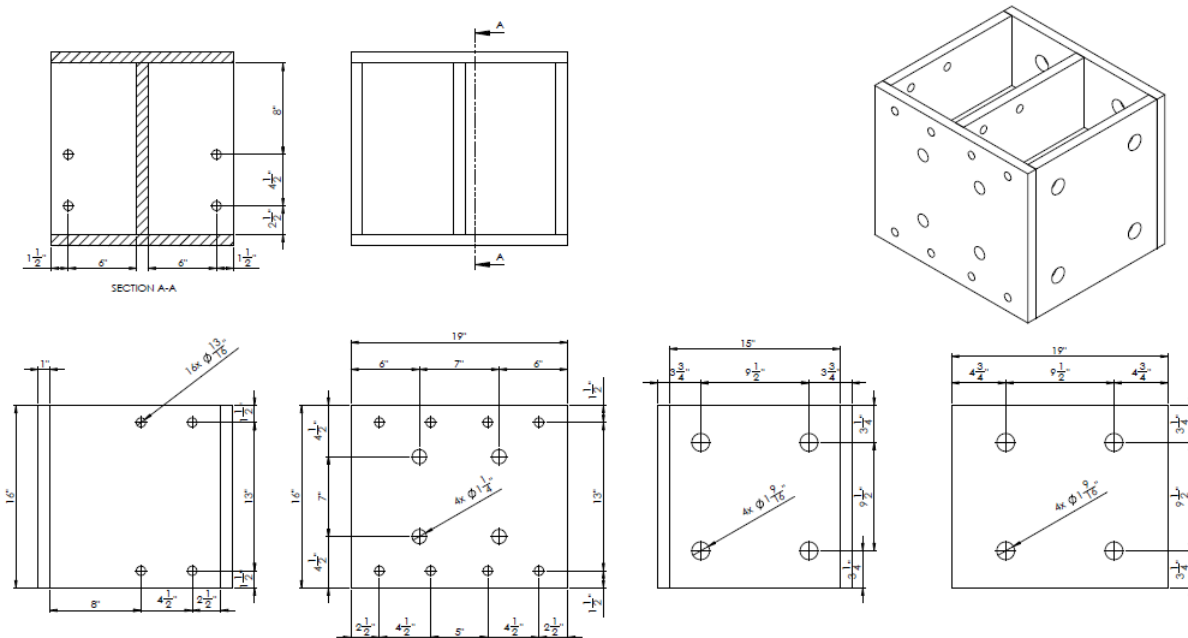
Load block detail drawings, interfacing actuator heads with specimen top plates.
